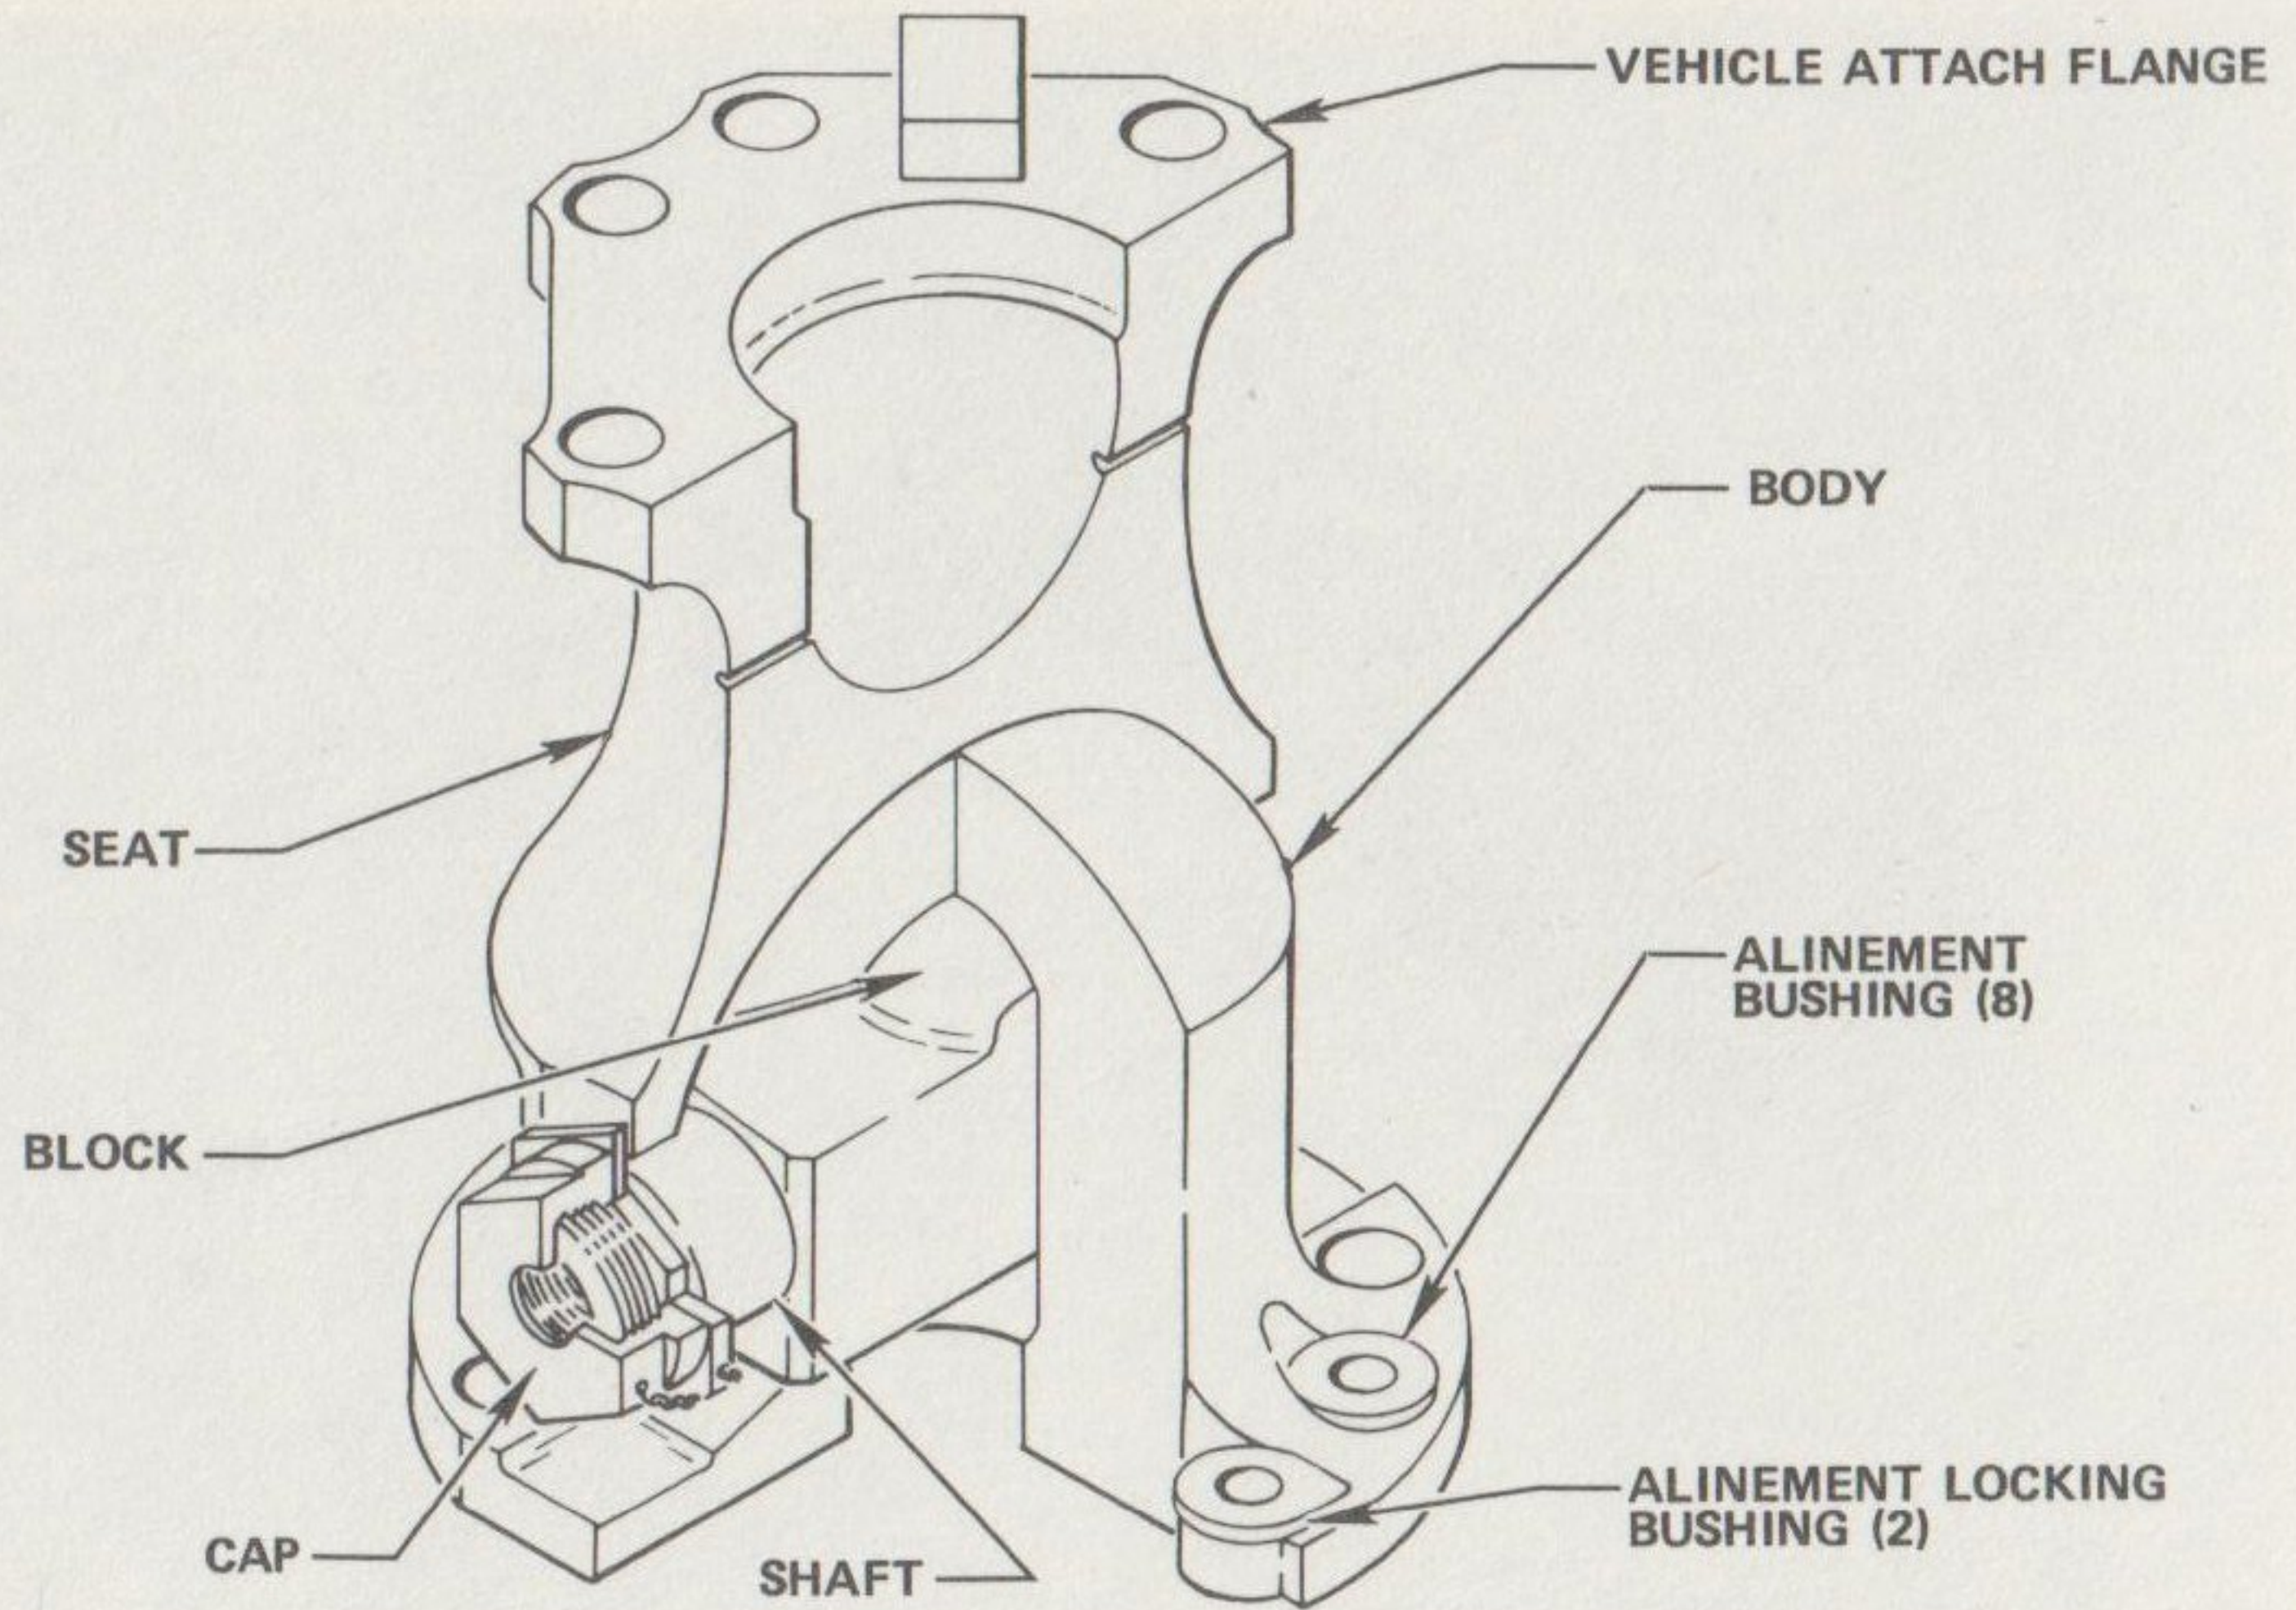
GIMBAL BEARING (SHEET 1 OF 2)
